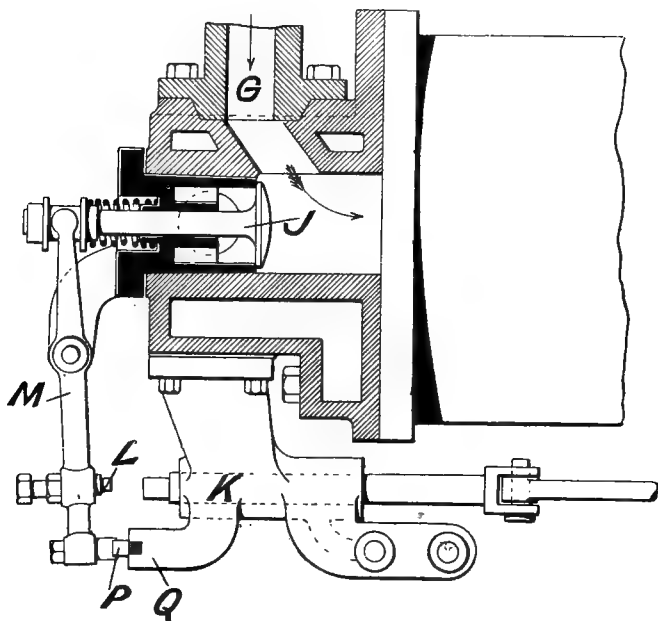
Campbell Oil Engine (horizontal section through exhaust valve)
